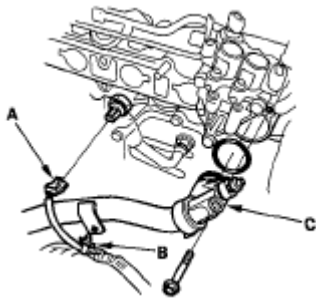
Locating Knock Sensor Connector, Harness Clamp & Connecting Pipe
